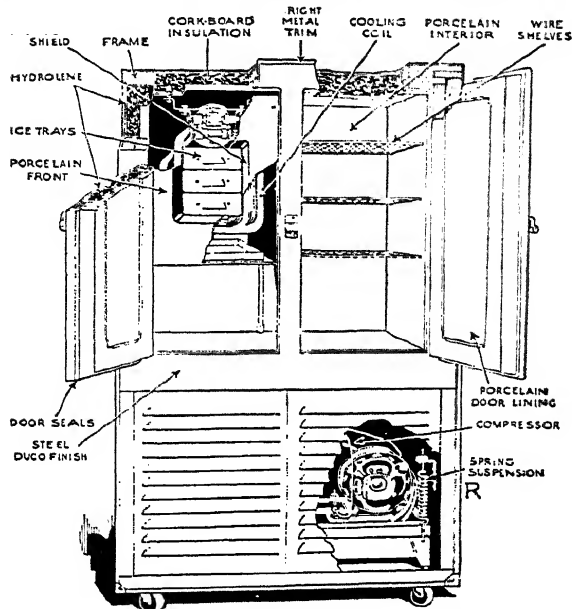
Spring suspension of refrigerating machine in base of cabinet. and is located so that it opens the motor switch when the condenser gage pressure reaches 180 pounds per square inch. It is
